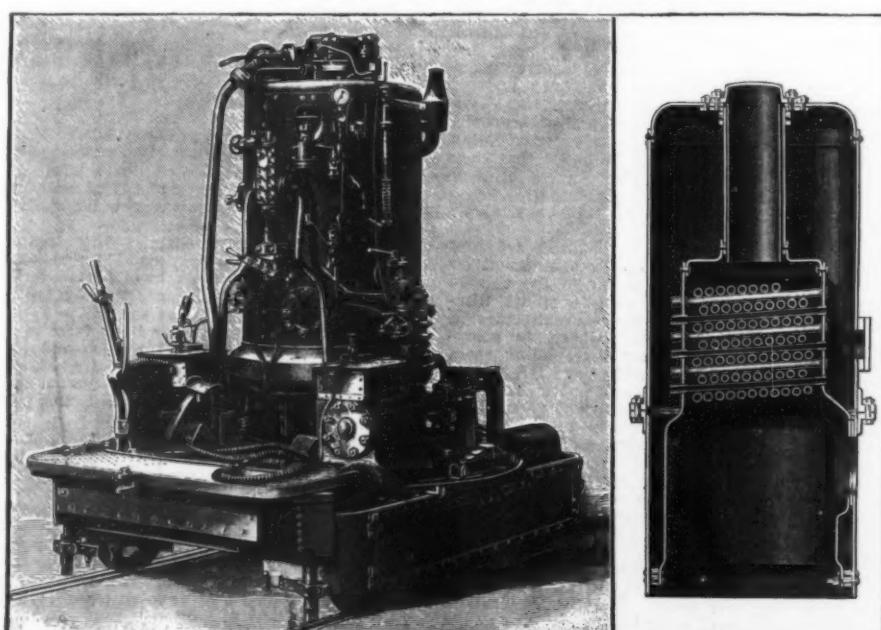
STEAM BOGIE FOR THE ROWAN MOTOR CAR.—SECTION OF THE BOILER.
